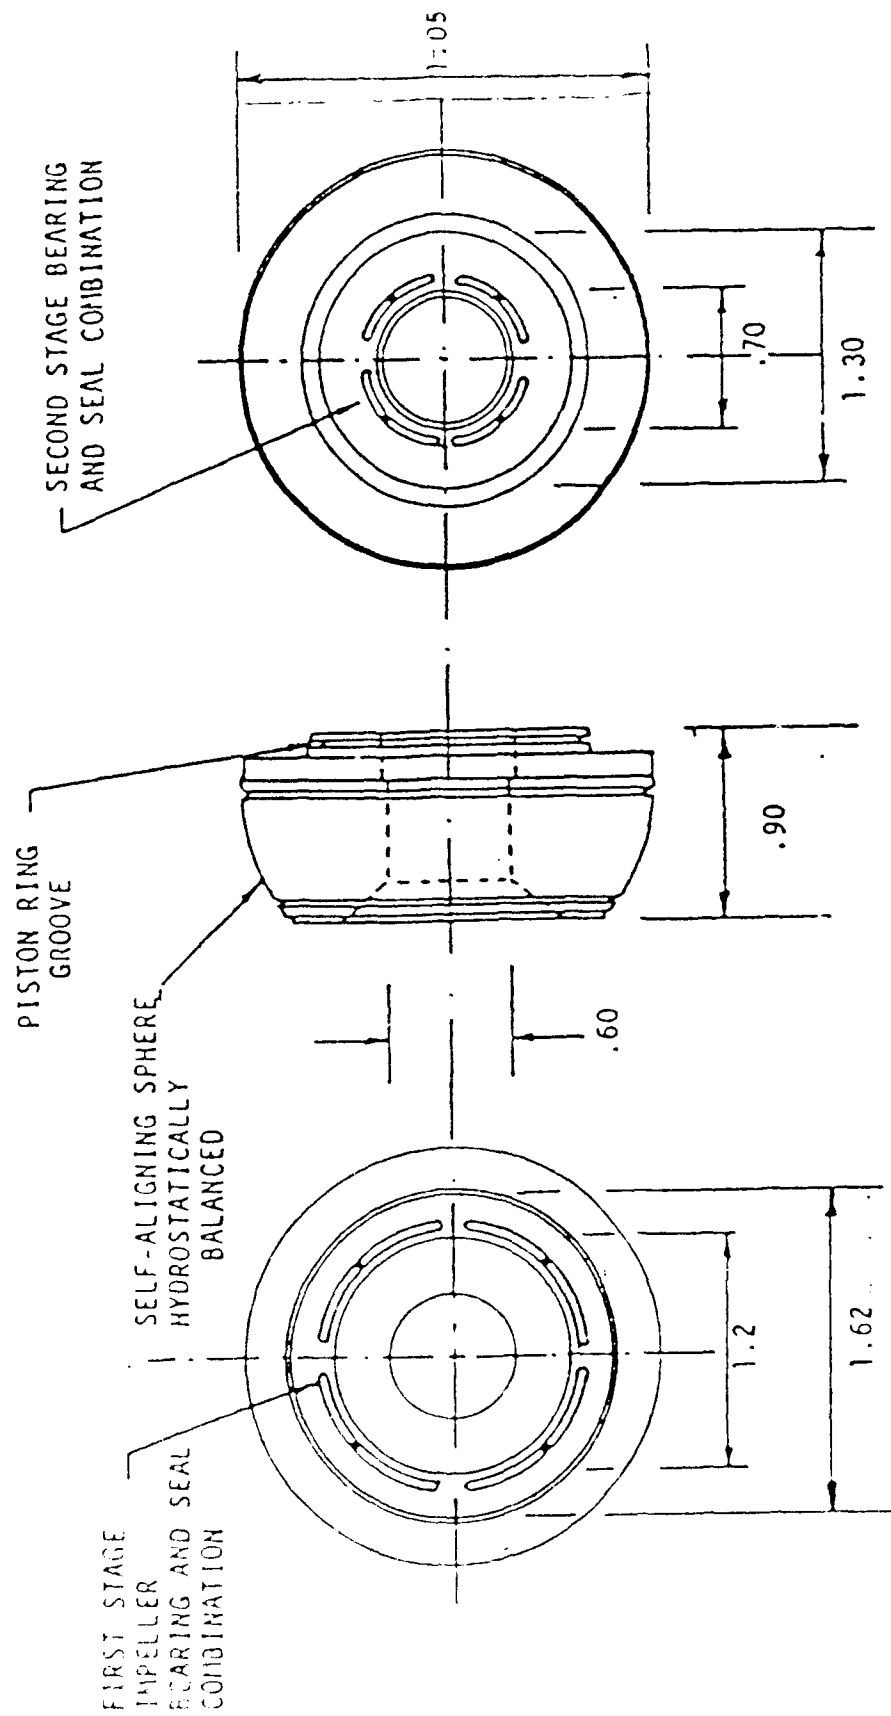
Pump End Hydrostatic Thrust and Journal Bearing
